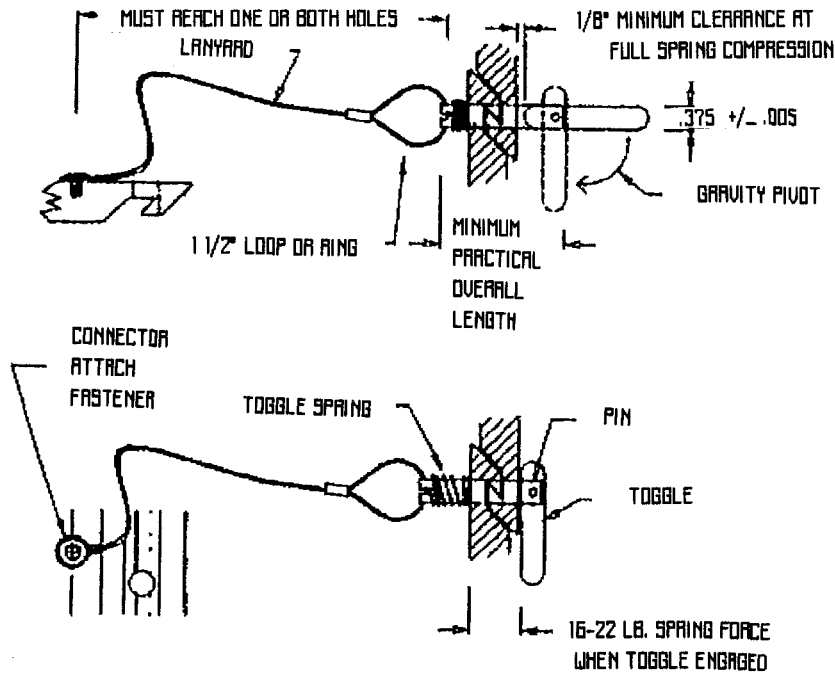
Self Locking Cross Pin / Lanyard Assembly
